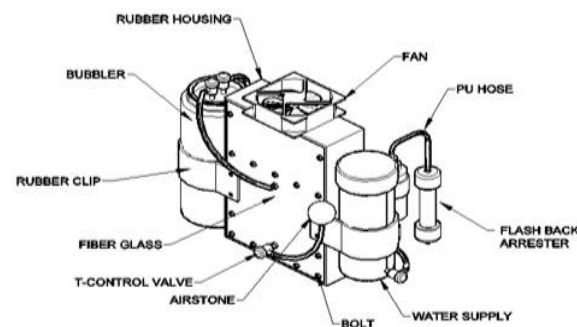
Front perspective view of Motorcycle Fuel Enhancer.
